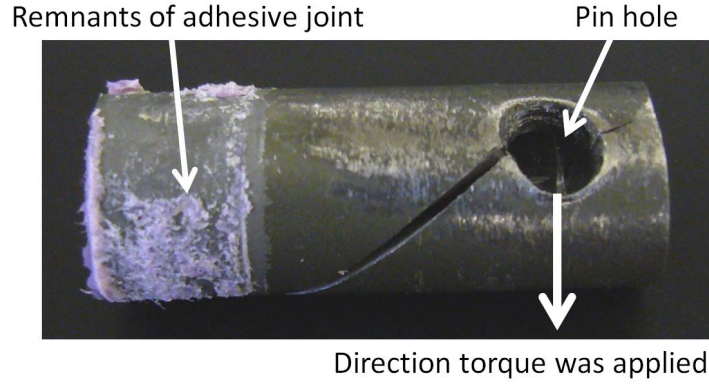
Failure in adhesive specimen due to poorly made pin hole.
